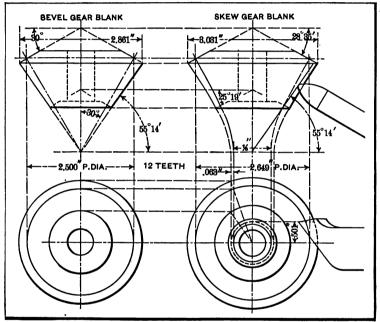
Turning the Blanks for Skew Bevel Gears and Regular Bevel Gears
